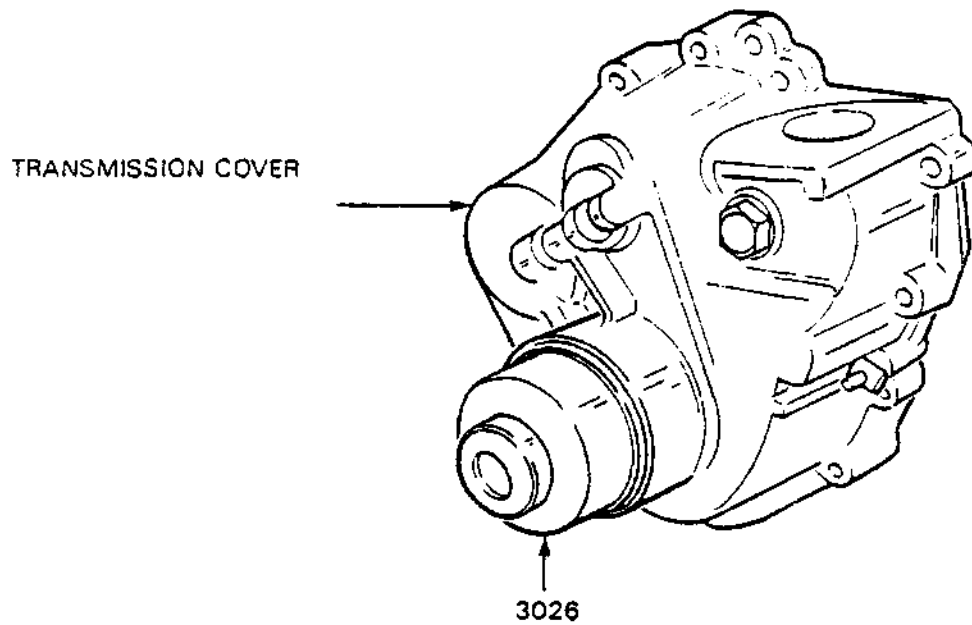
Installation of Propeller Shaft Drive Flange Oil Seals
